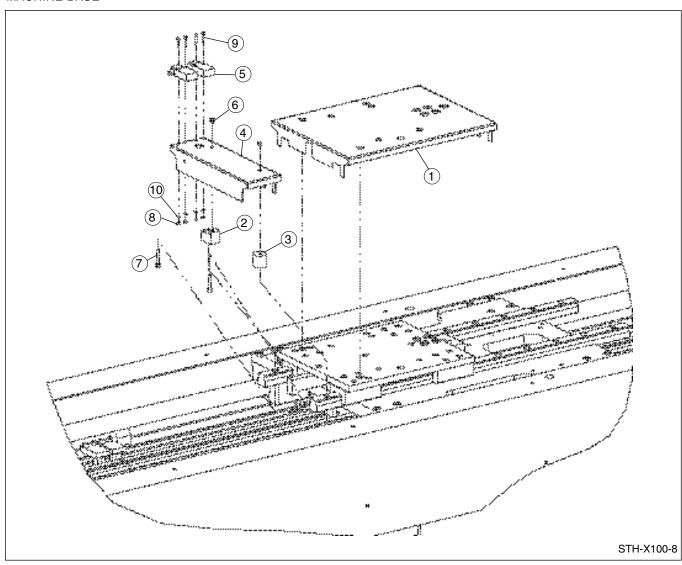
FIGURE A - TUBE HONE MACHINE BASE ASSEMBLY (8 of 8)
